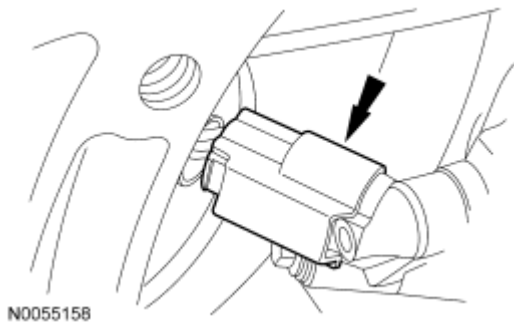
Identifying Crankshaft Position (CKP) Sensor Electrical Connector
